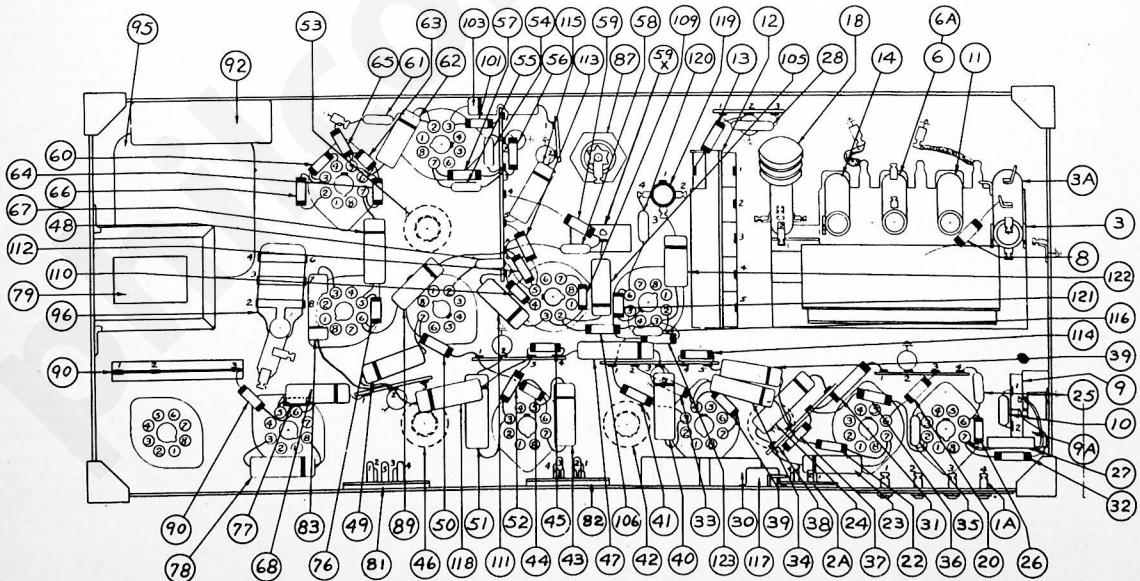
LOCATIONS OF PARTS—UNDER CHASSIS MODEL 42-1015, CODE 121
